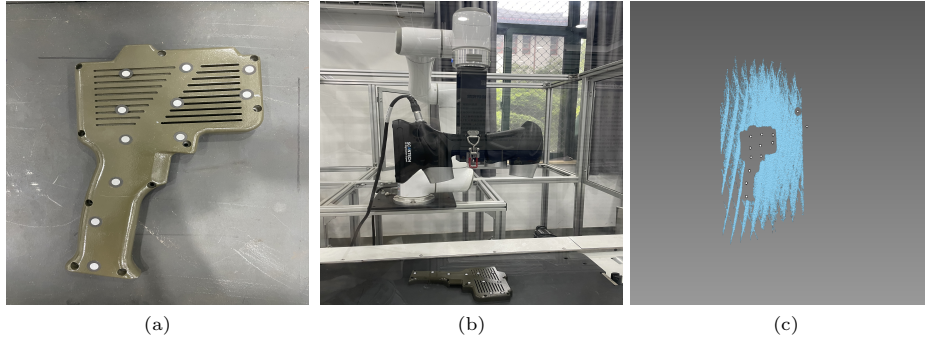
Experiment on 3D laser scanner robot (a)Figure of strip rolling gun; (b) 3D laser scanner robot; (c) 3D point cloud imaging;
